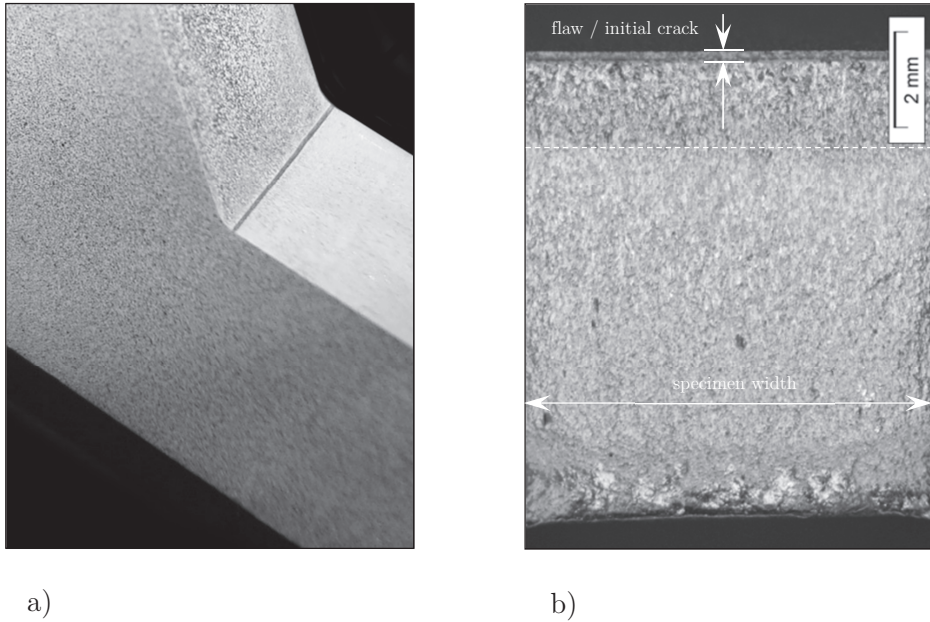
a) flaw geometry after YAG laser process, b) typical flaw; stereo microscope image after specimen failure.
